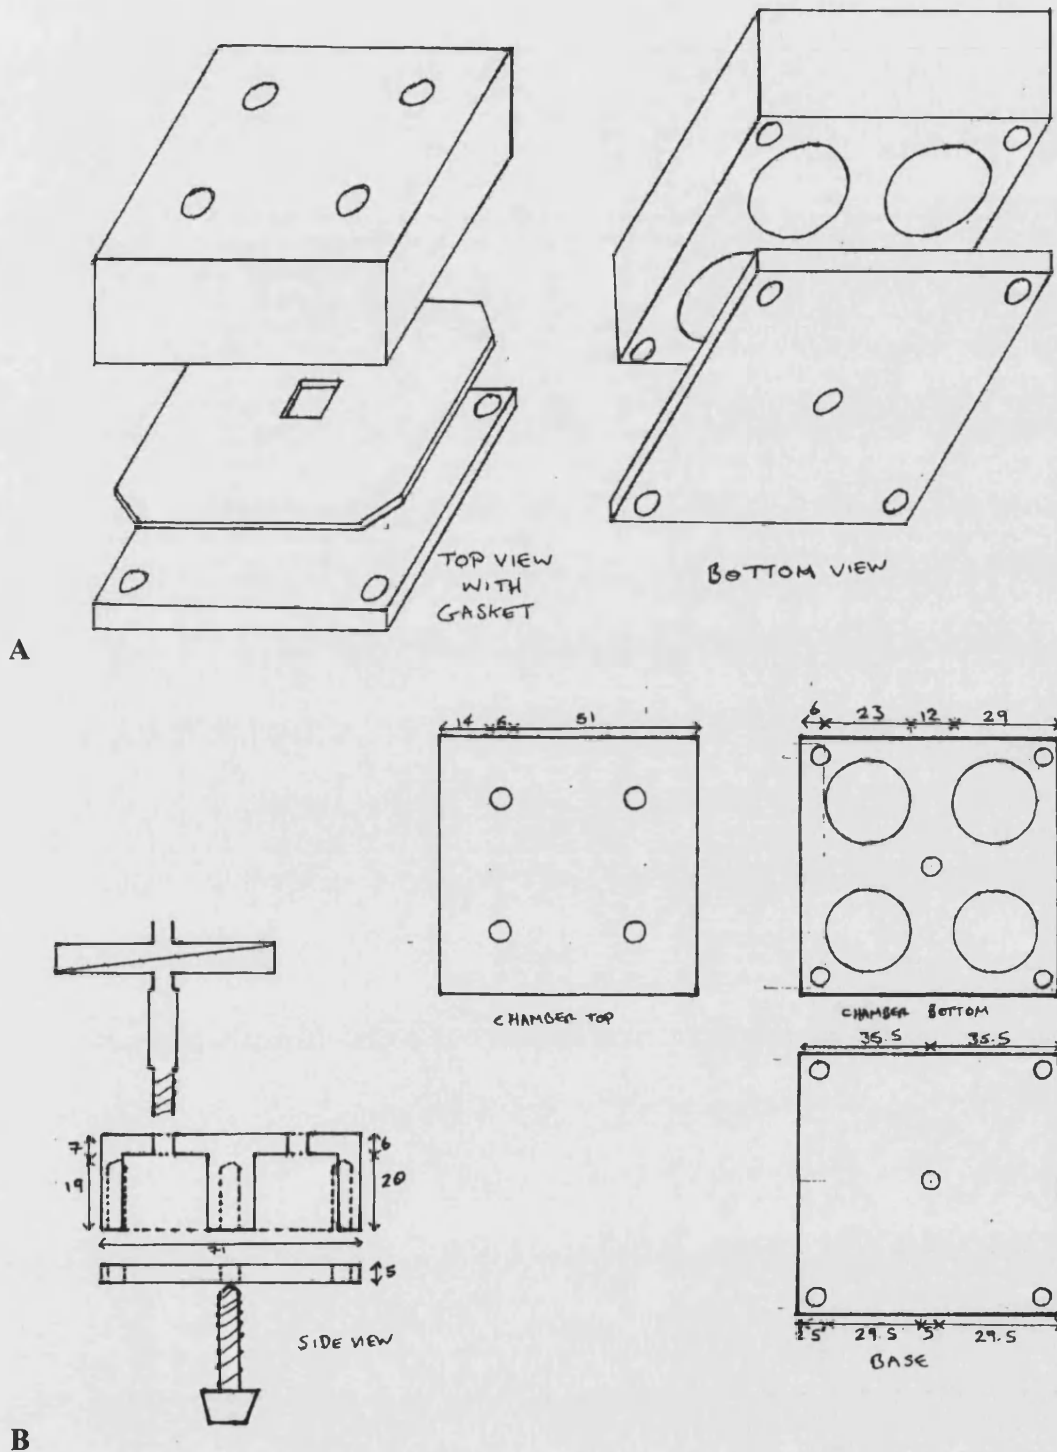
Engineering drawings of flat sheet membrane culture chamber.
